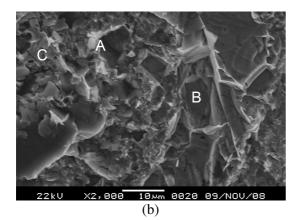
Fracture appearance on the side of filler metal (a) under low magnification view; (b) under high magnification view.
